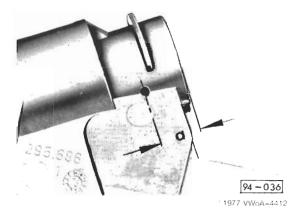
Location for hole in ignition switch housing. Dimension a is 13 mm (just over ½ in.).
